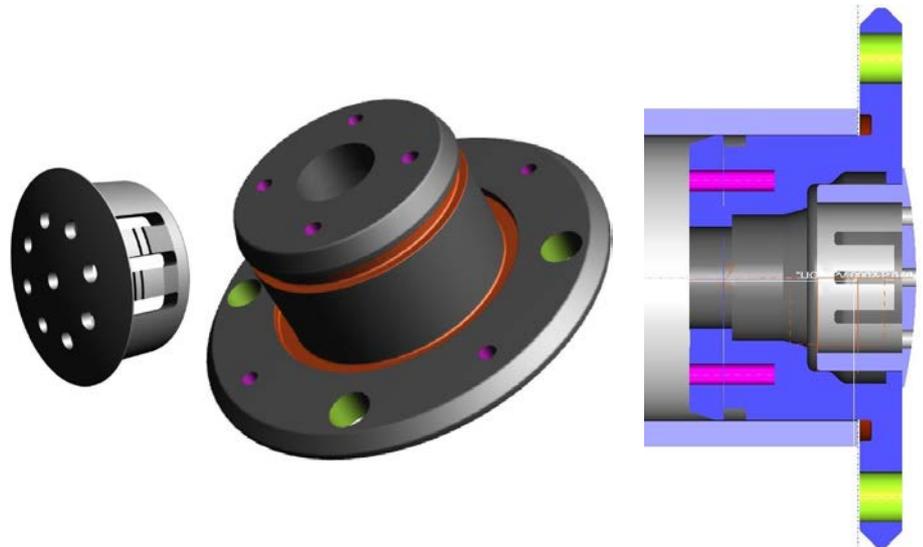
Pressure housing: 3D CAD drawings of end cap
